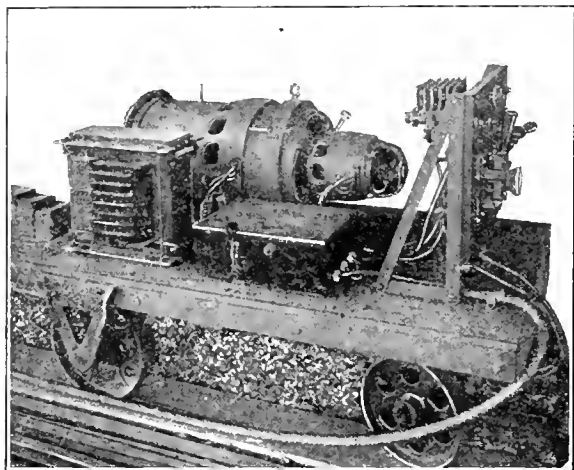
PORTABLE MOTOR-GENERATOR ARC-WELDING SET
